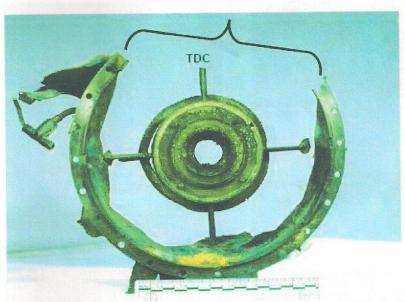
View showing the general condition of the Power Turbine Support Assembly. Bracket indicates an area where the entire outer case, including bolt flange, was missing.
